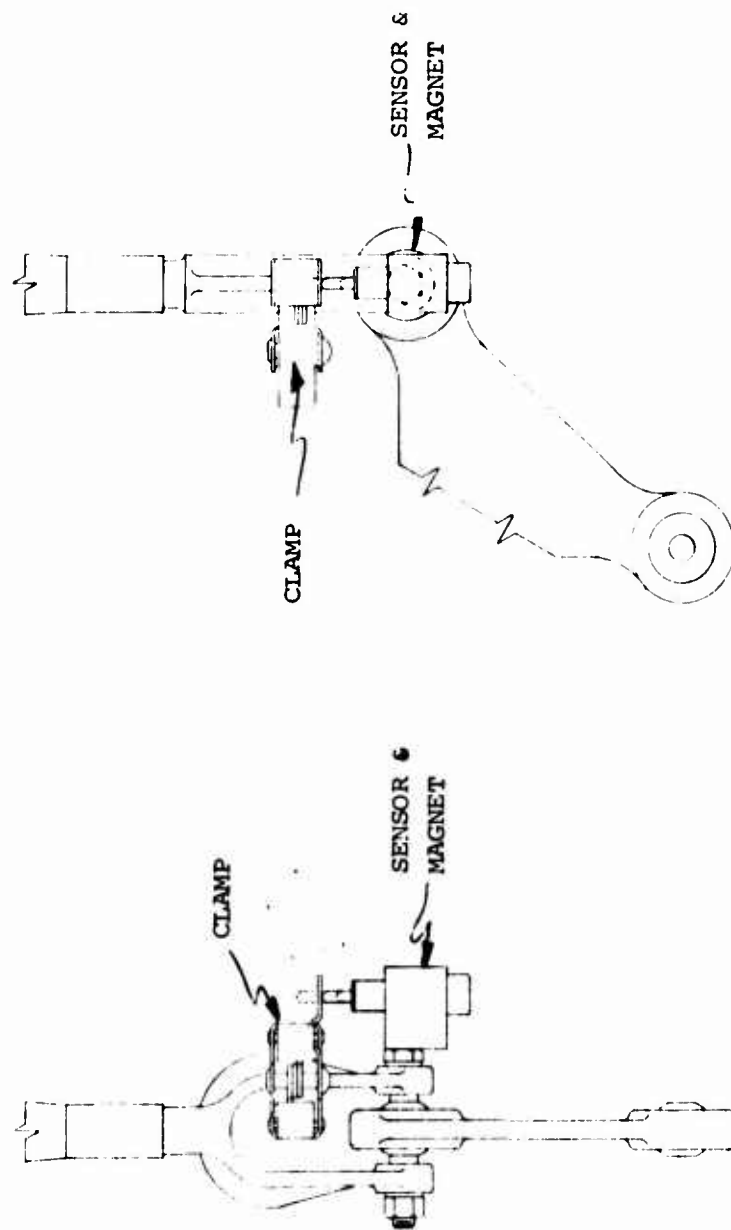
Rod End Bearing Play Sensor - Radial Direction.
